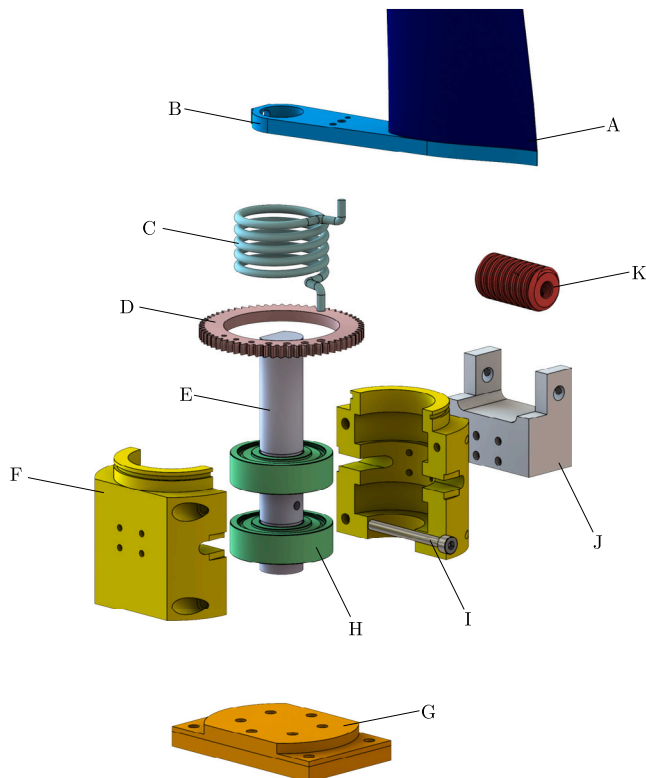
Exploded view of the passive pitching mechanism, with annotated components: (A) turbine blade; (B) spacing arm; (C) torsion spring; (D) preload spur gear; (E) pitching shaft; (F) mechanism frame; (G) mounting plates; (H) ball bearings; (I) retention and limiting screw; (J) preload worm mounting frame; (K) preload worm.
